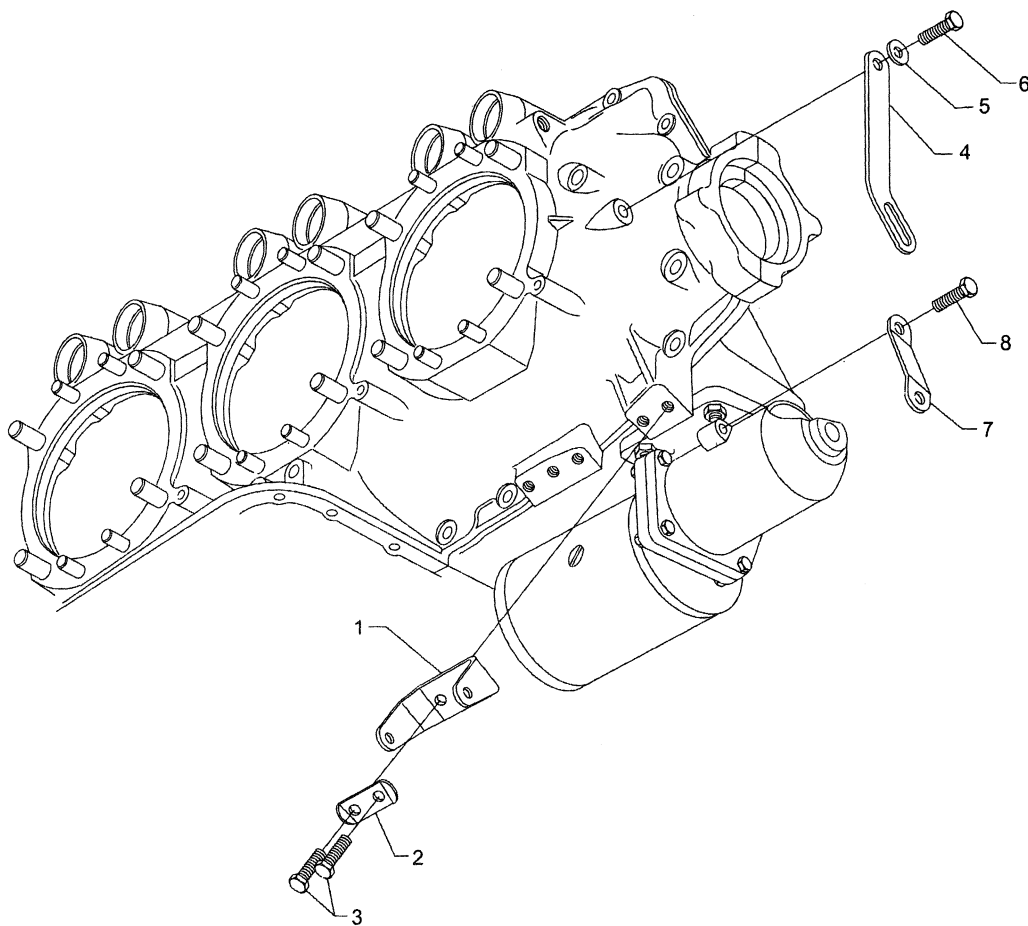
ALTERNATOR MOUNTING AND ATTACHING PARTS
